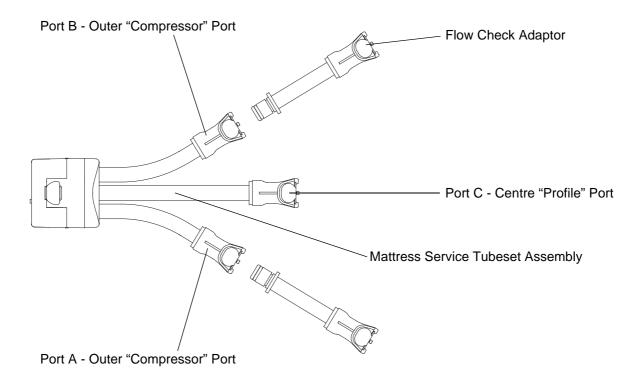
Mattress Service Tubeset Assembly with Flow Check Adaptors
